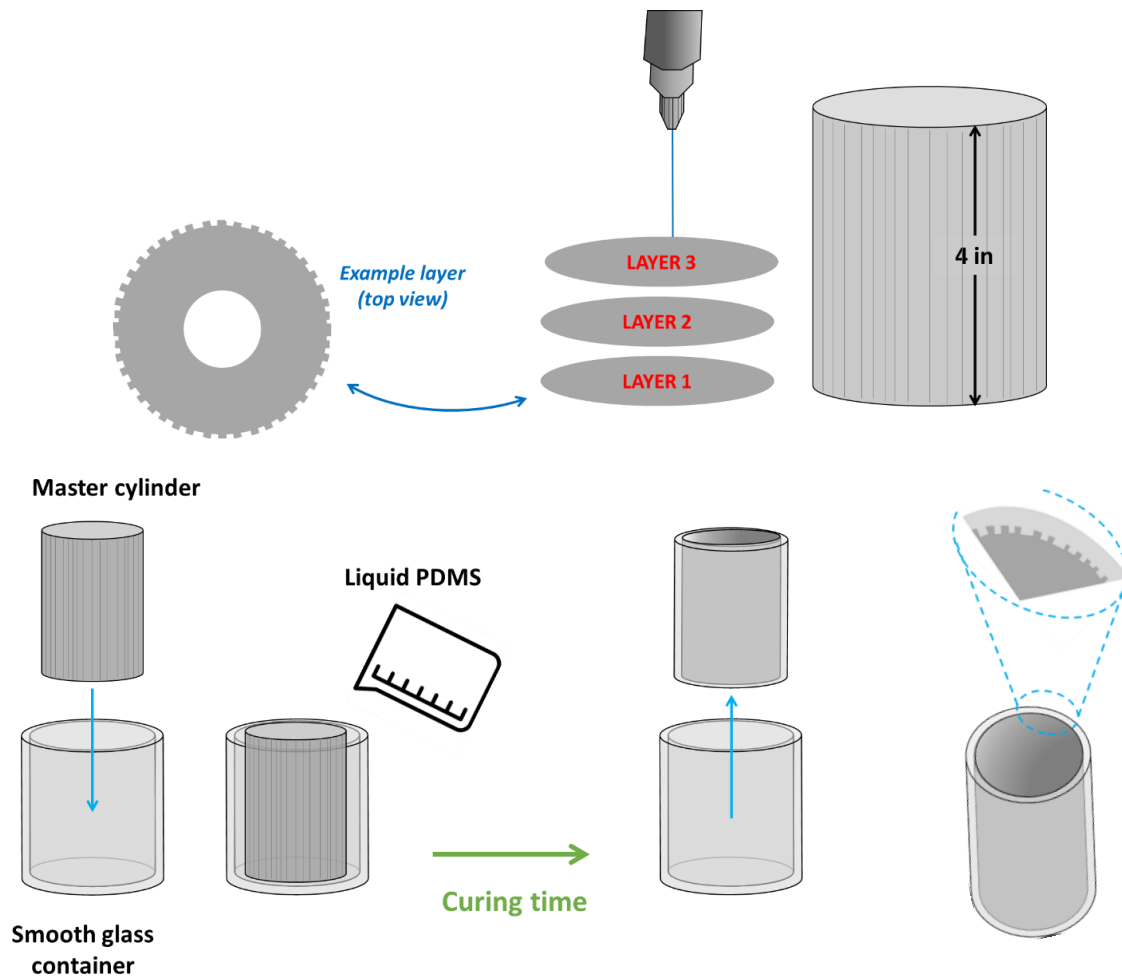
Diagram showing fabrication of patterned master cylinder, which is used in the mold to create a PDMS stamp of uniform thickness. The catch is that the pattern is on the inside of the cylinder rather than the outside.
